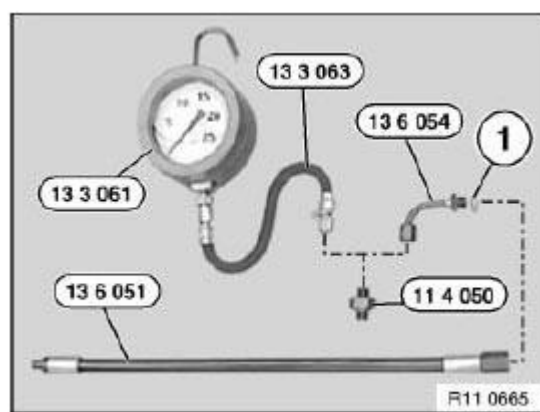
Checking Engine Oil Pressure With Diagnosis Tester
